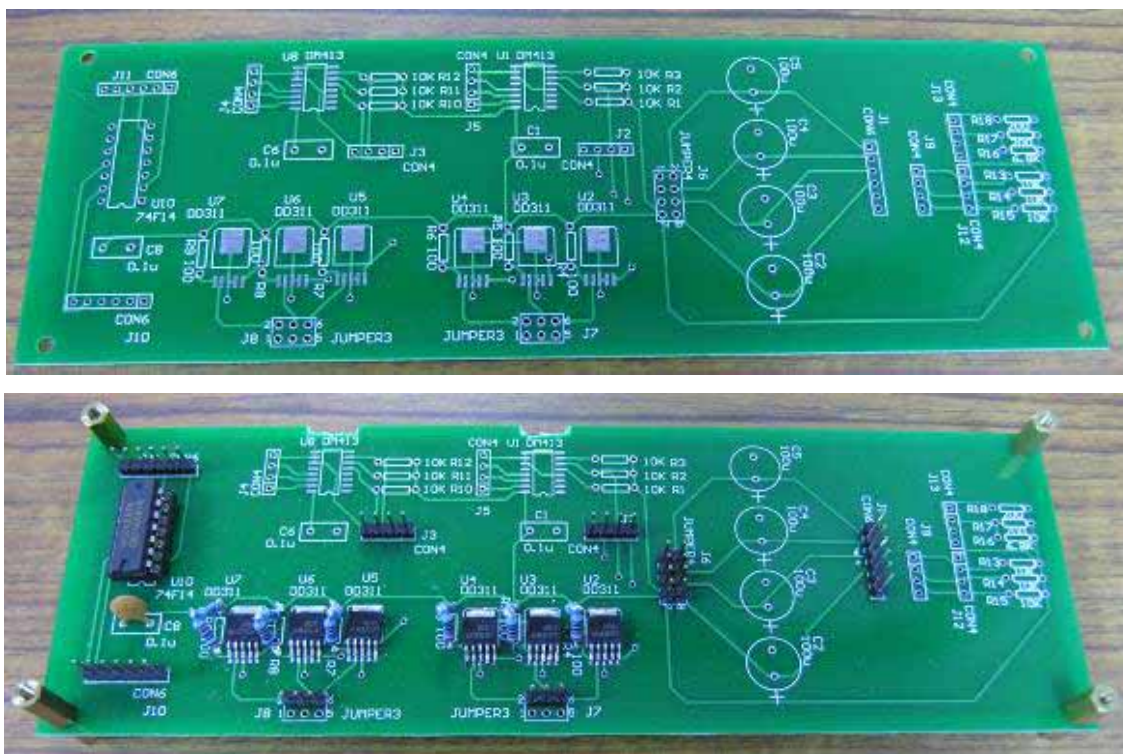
The bare PCB (upper), and the PCB with LED driver soldering (bottom).
